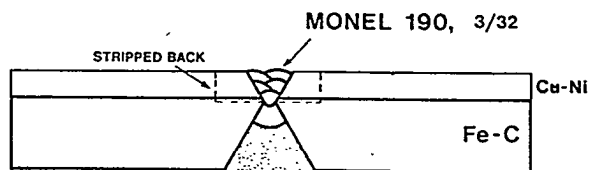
Graphical illustration of the welding of Cu/Ni clad steel.
